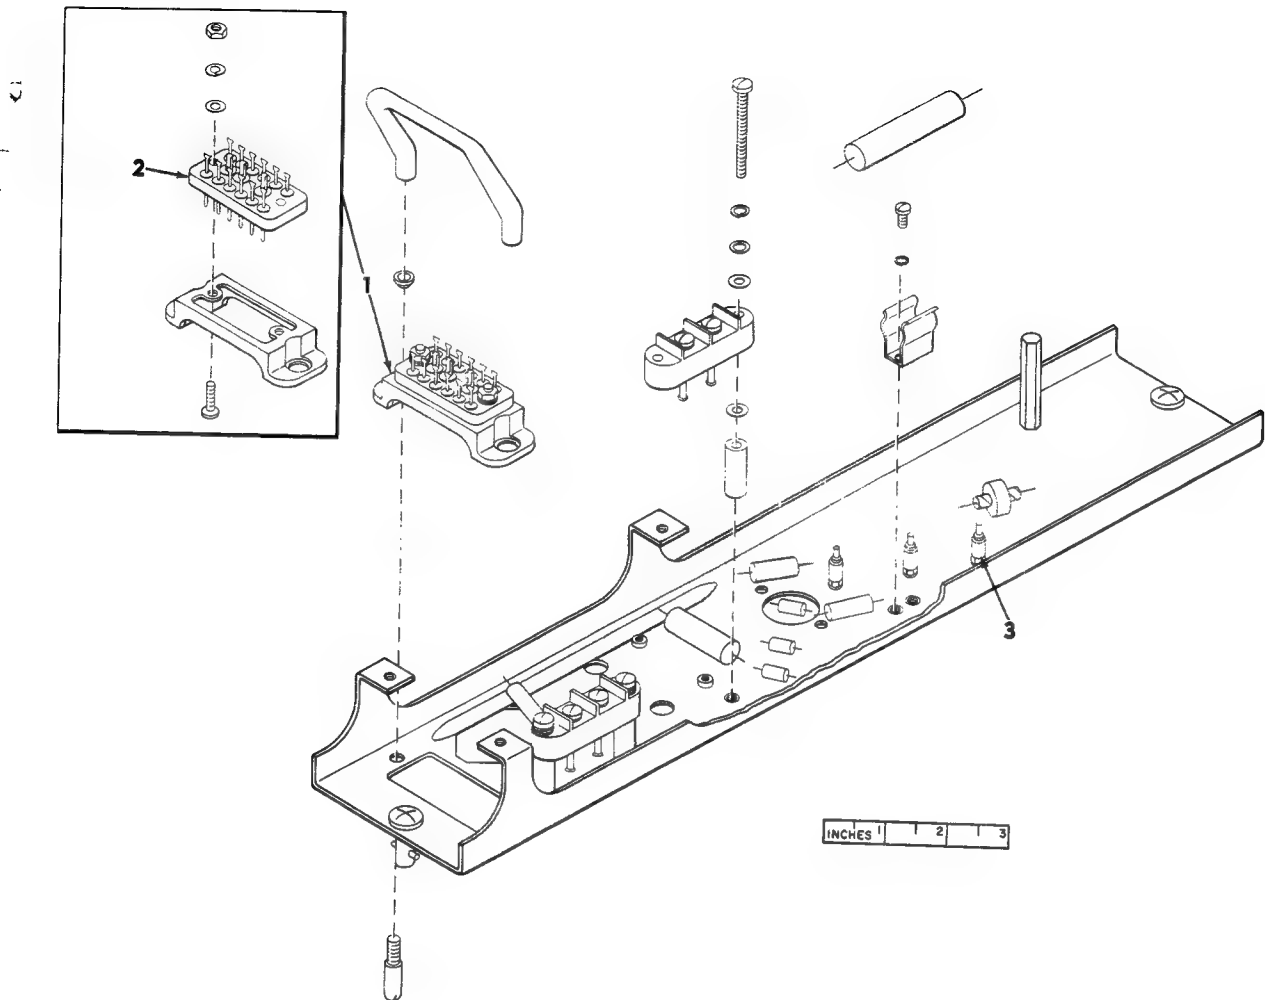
Generator, sweep 0-475/MPA (8172375)—partial exploded view
